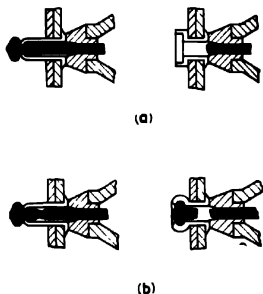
The "pop" riveting process using (a), the break-head mandrel, and (b), the break-stem mandrel.
